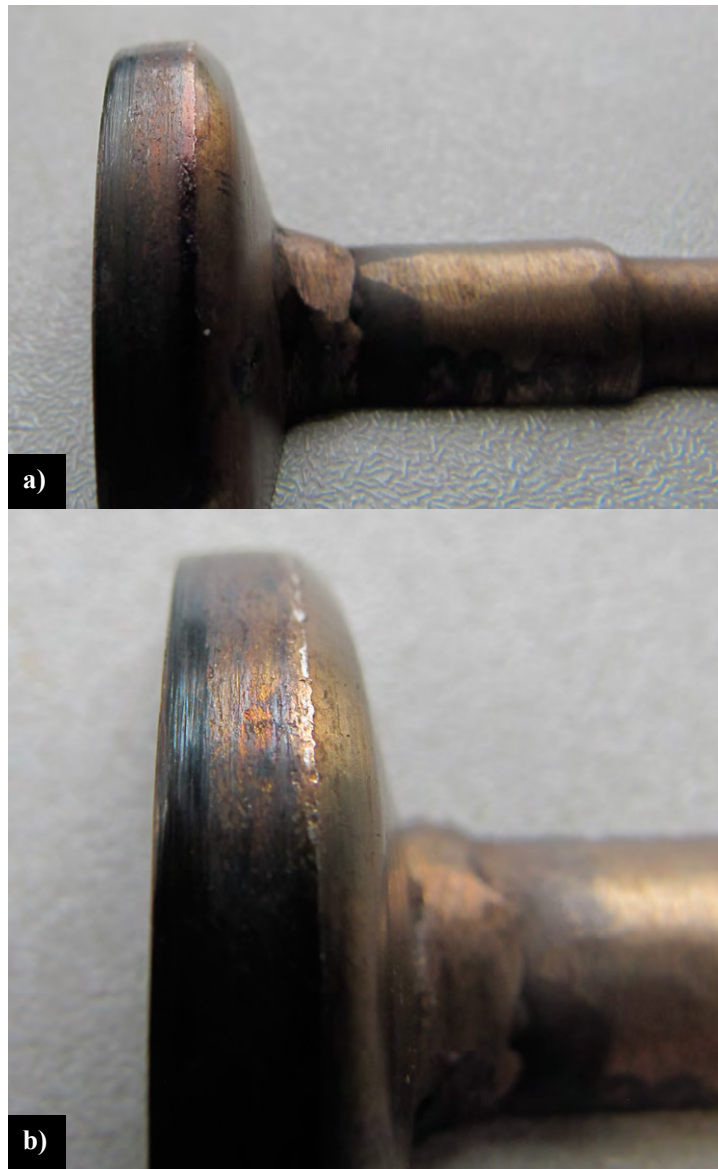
Photograph of the outer edge of the disk around the oil tube with slightly different angles a) and b)
